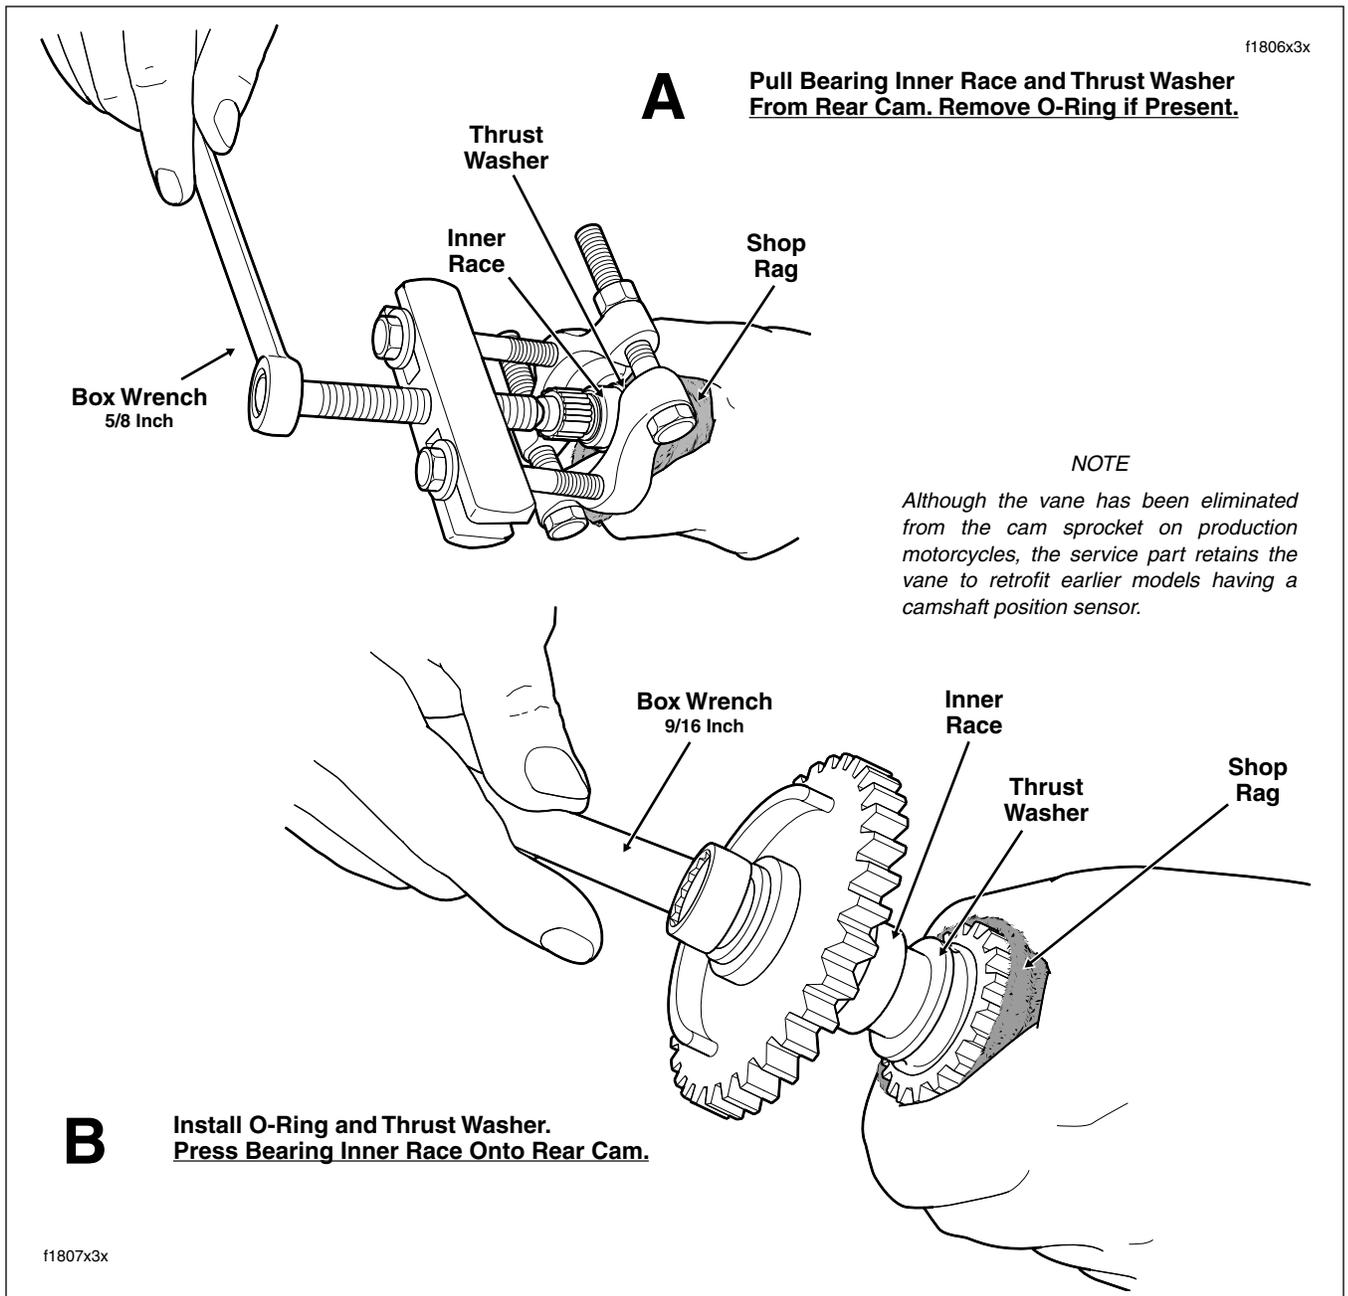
Remove/Install Bearing Inner Race (With O-Ring and Thrust Washer) Onto Rear Camshaft
